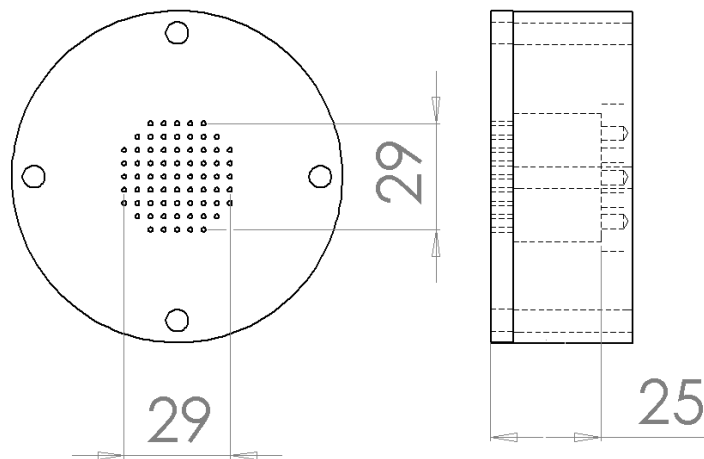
Design space for resonant array sample to be used with the small scale impedance meter. (Dimensions in millimetres)
